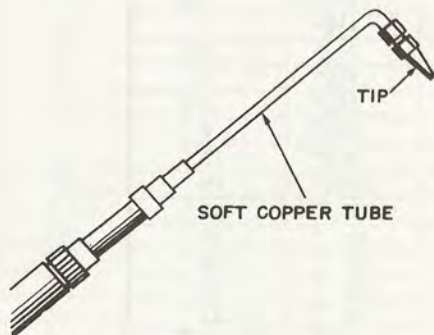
You can bend a flexible tip extension to direct the heat wherever you need it while working in crowded places.
